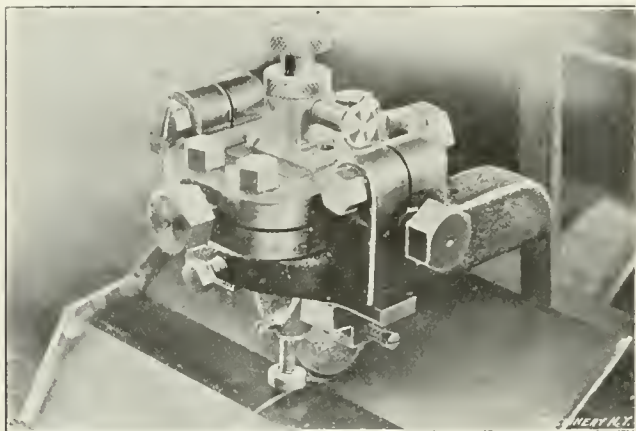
General Appearance of Machine shown in Detail in Fig. 17
